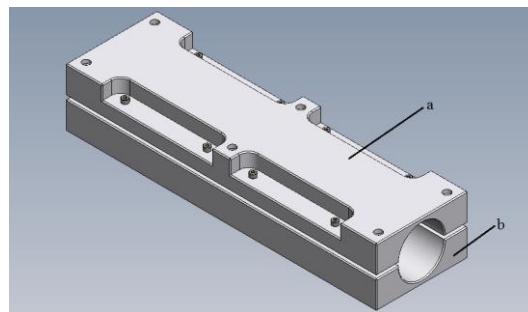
Isometric view of the molds which were divided into two parts: (a) upper mold half and (b) lower mold half
